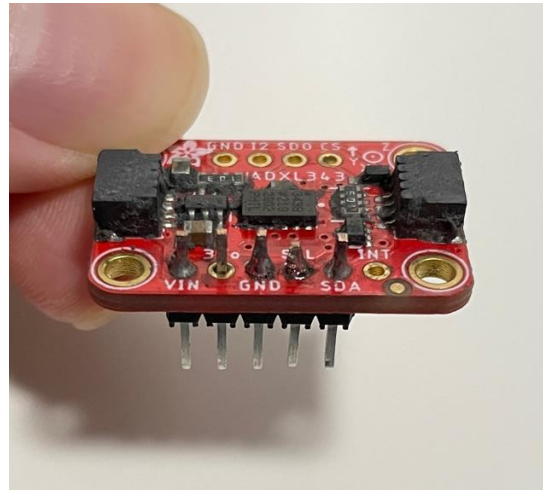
Soldered accelerometer board. Unused pins like "3Vo" pin can be left unsoldered.
